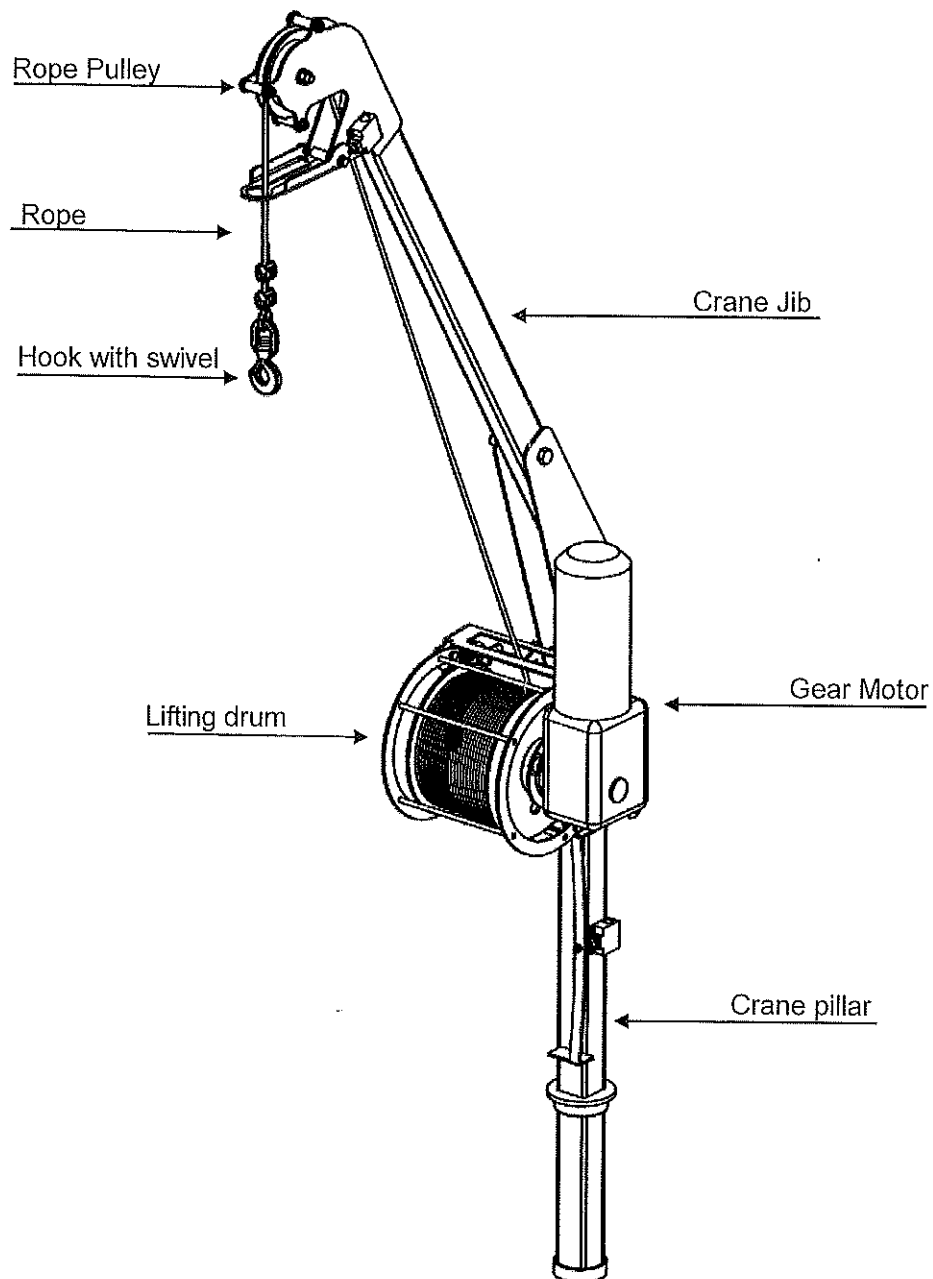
, showing the main parts of the iRaptor, for more detailed view go to Chapter 7. Sparepart list
